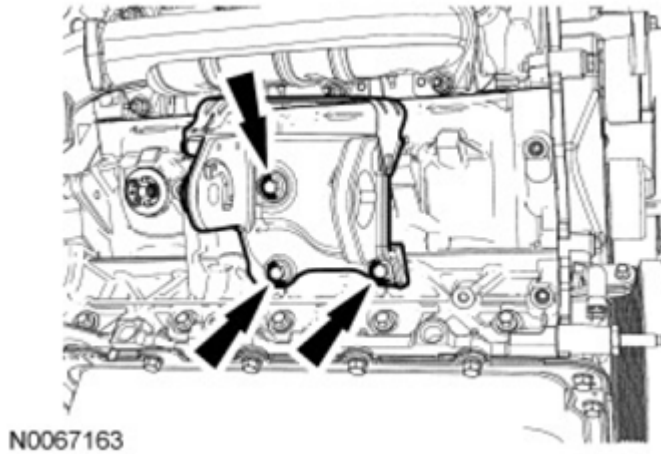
Locating RH Engine Support Insulator Bracket Bolts
